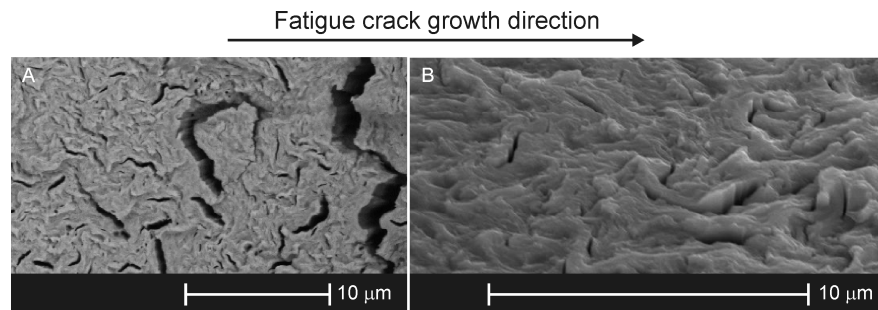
Fatigue fracture surface with secondary cracks. A. Secondary crack become deeper with increasing crack length. B. Fatigue crack jumps up and down after secondary cracks.
